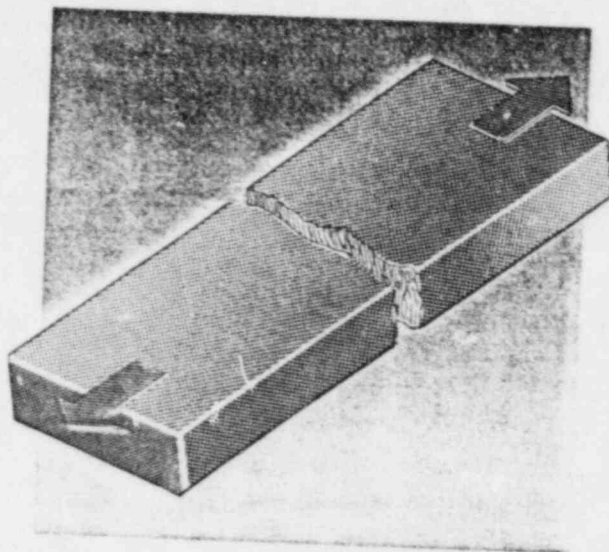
In welding this break, expansion forces are free to move as heating and cooling occur.
